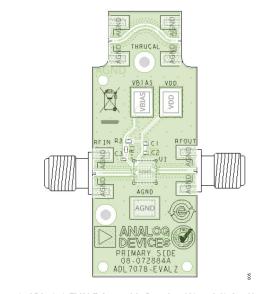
ADL7078-EVALZ Assembly Drawing (J1 and J2 Are Not Installed)
